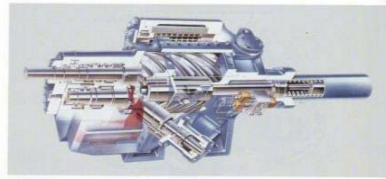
Screw compressor with matched set of helical rotors. Designed to operate with ammonia, R-134a, or some other types of refrigerants. (ABB Rot Refrigeration Corporation)
